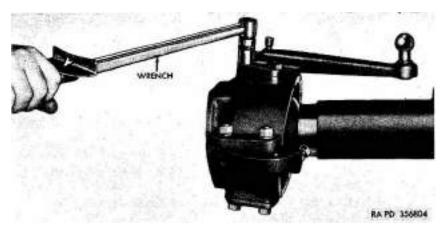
Checking preload of flange bearings with torque indicating wrench.
